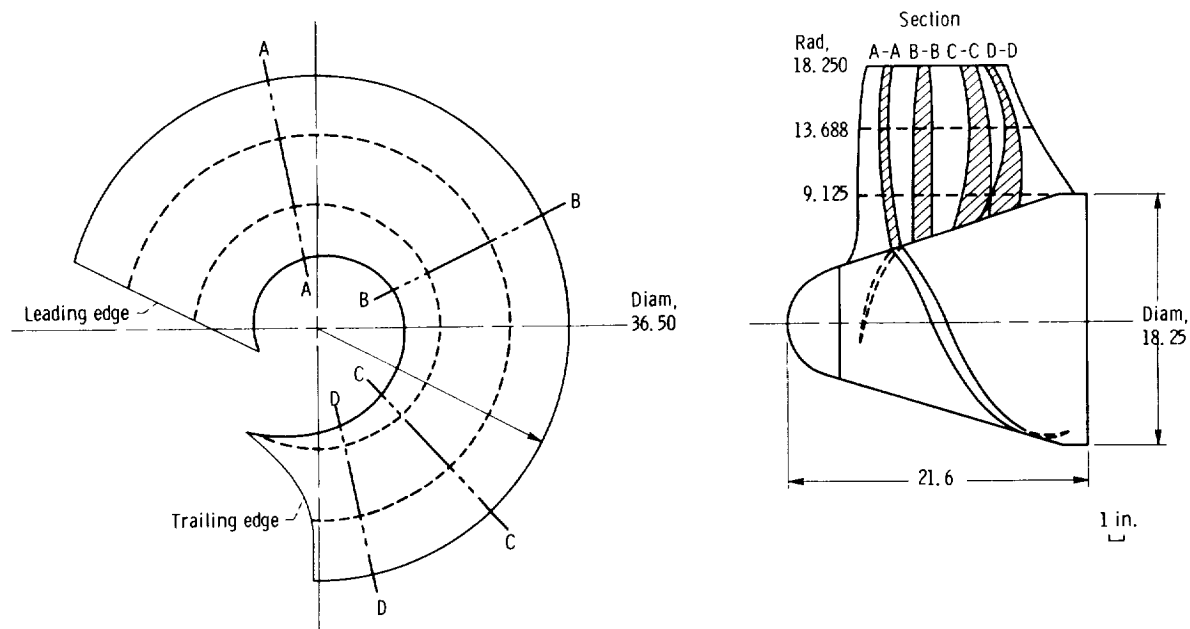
Axial view and circular projection of inducer blade. (Dimensions in inches.)
